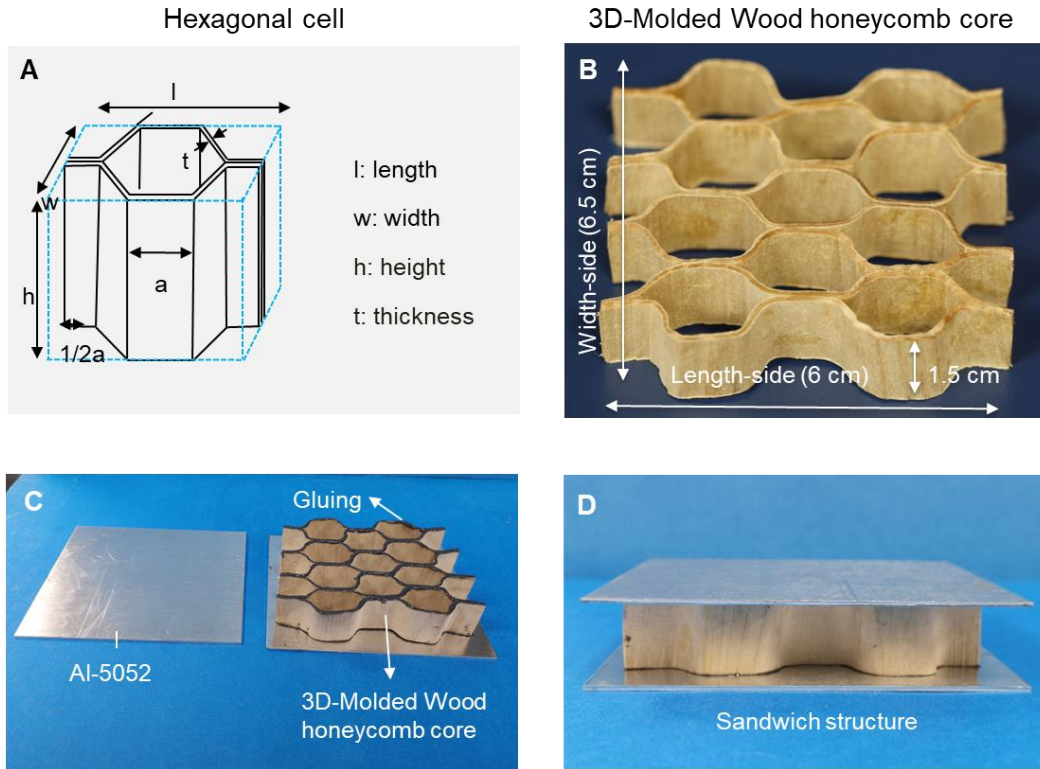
The fabrication of the Al-3D-Molded Wood-Al honeycomb core sandwich structure. (A) Schematic of a honeycomb unit. (B) Photograph of the 3D-Molded Wood honeycomb core. (C) Photograph demonstrating the 3D-Molded Wood honeycomb core being glued between two sheets of Al-5052. (D) Photograph of the final Al-3D-Molded Wood-Al honeycomb core sandwich structure.
